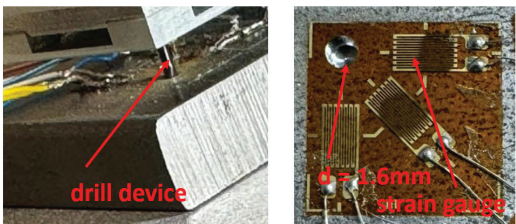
Internal stress measurement with hole-drilling method. Drill in action (left) and drill hole scheme with strain gauges (right).
